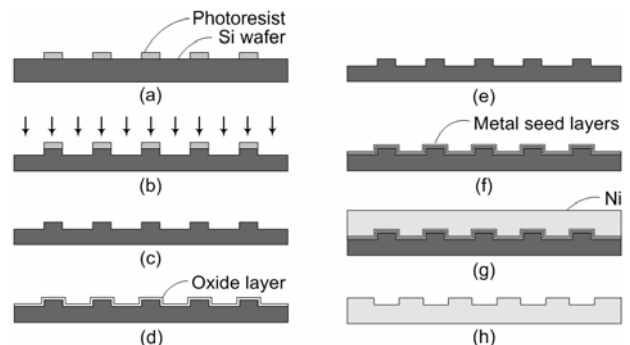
The fabrication process of Ni mold: (a) photolithography; (b) Si dry etching; (c) plasma ashing; (d) oxide layer growth; (e) remove the oxide layer; (f) Cr/Cu seed layer deposition onto the Si wafer; (g) Ni electroforming process; (h) remove the Si and Cr/Cu seed layer
